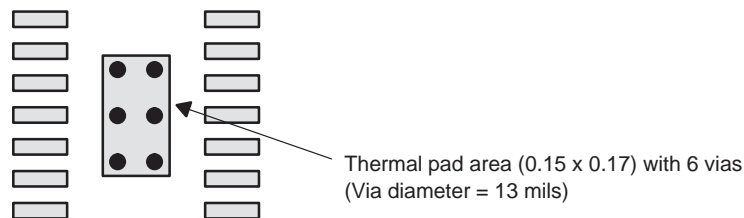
THS6043 PowerPAD PCB Etch and Via Pattern – Minimum Requirements
